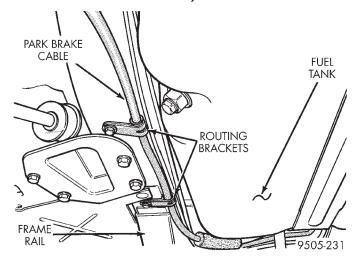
Park Brake Cable Routing Brackets (Left Side)
